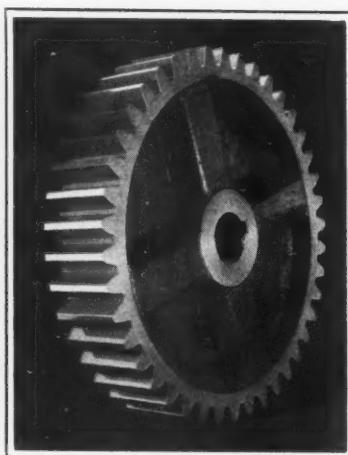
"Philweld" Welded-steel Spur Gear
